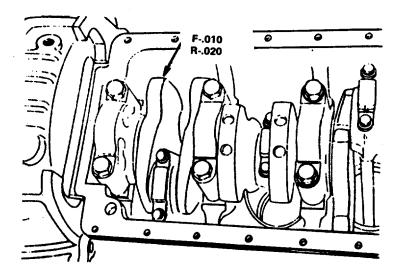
Example of Oversize Thrust Bearing Marks.
